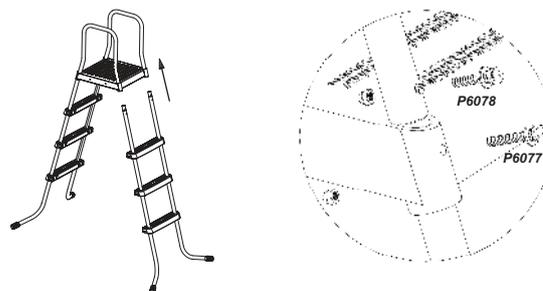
6. Tighten All the Screws. Insert P6213(warning board). (figure 6):
